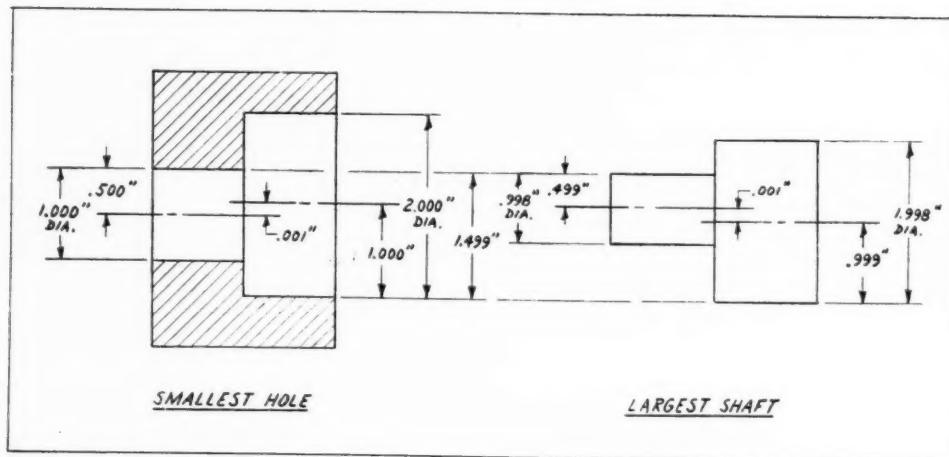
The first step in dimensioning by conventional methods is to determine the minimum clearance between the smallest hole and largest shaft, taking into account an allowance for eccentricity
